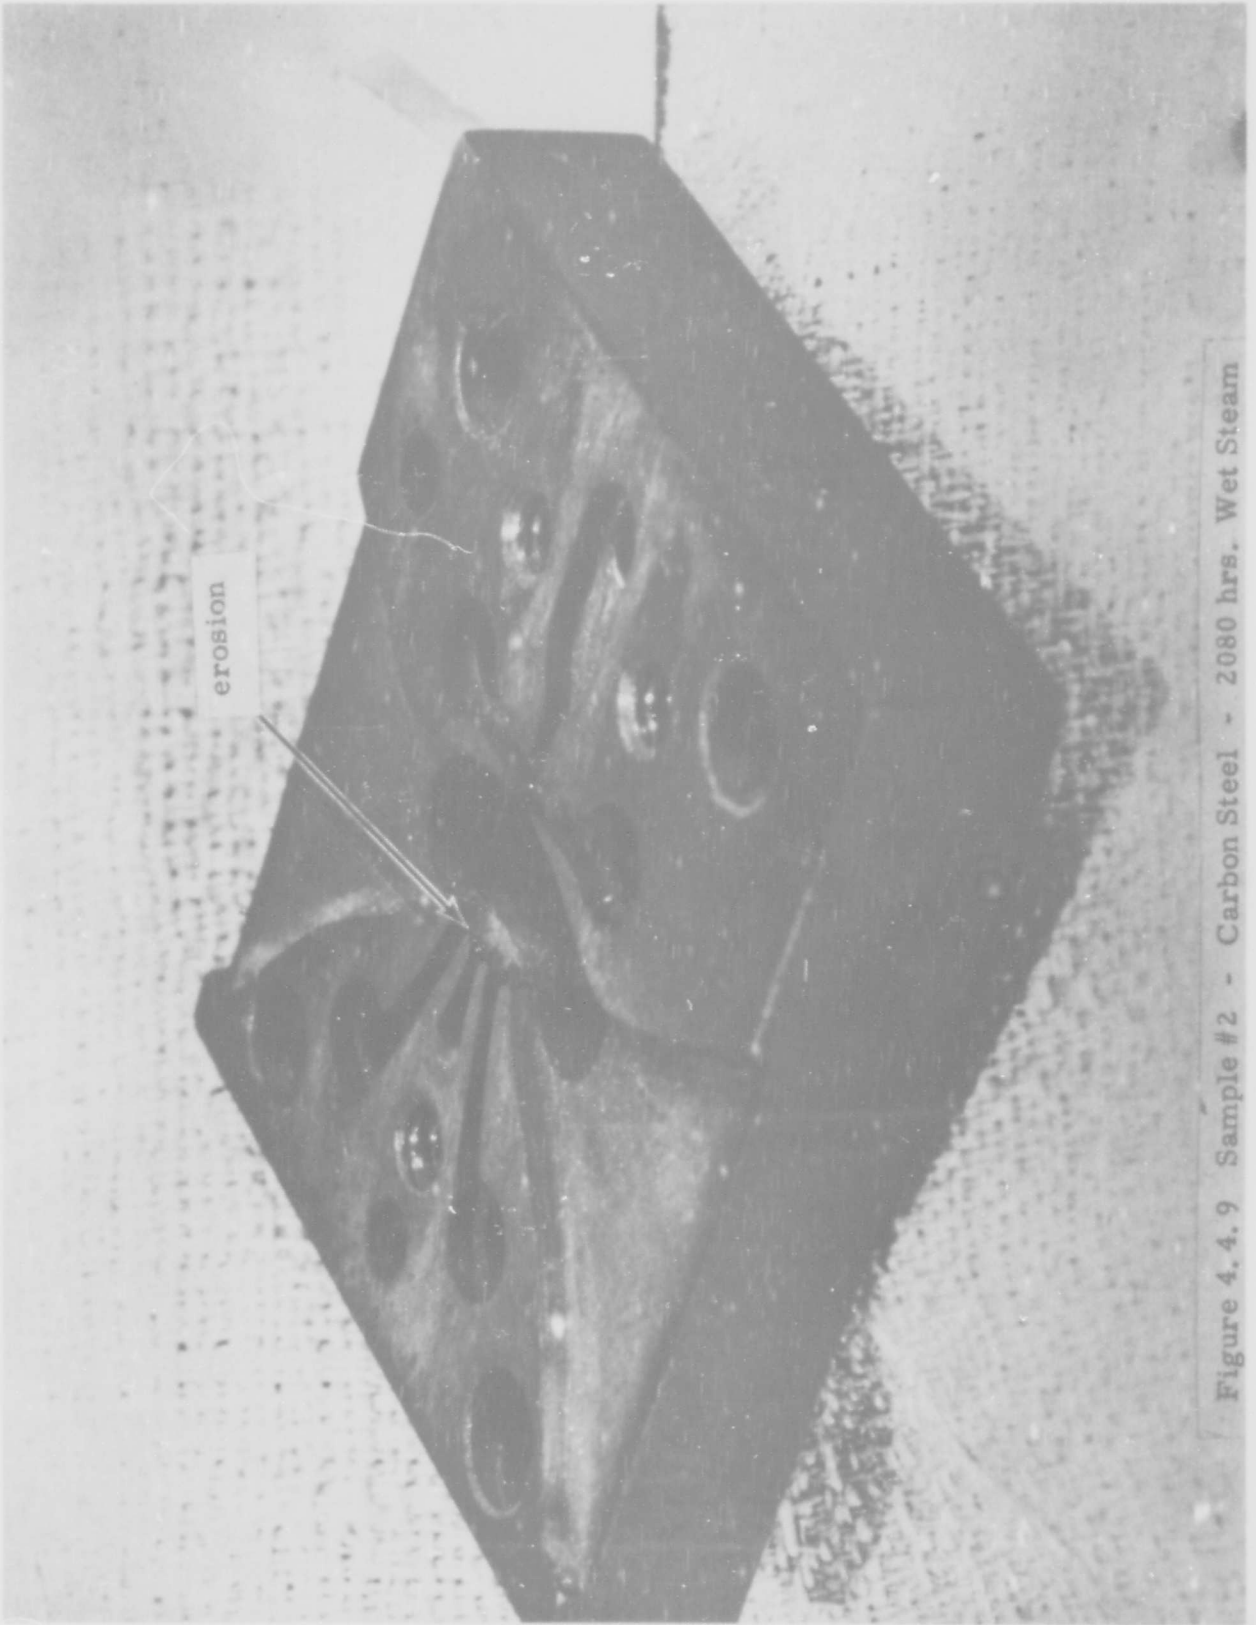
Sample #2 - Carbon Steel - 2080 hrs. Wet Steam
